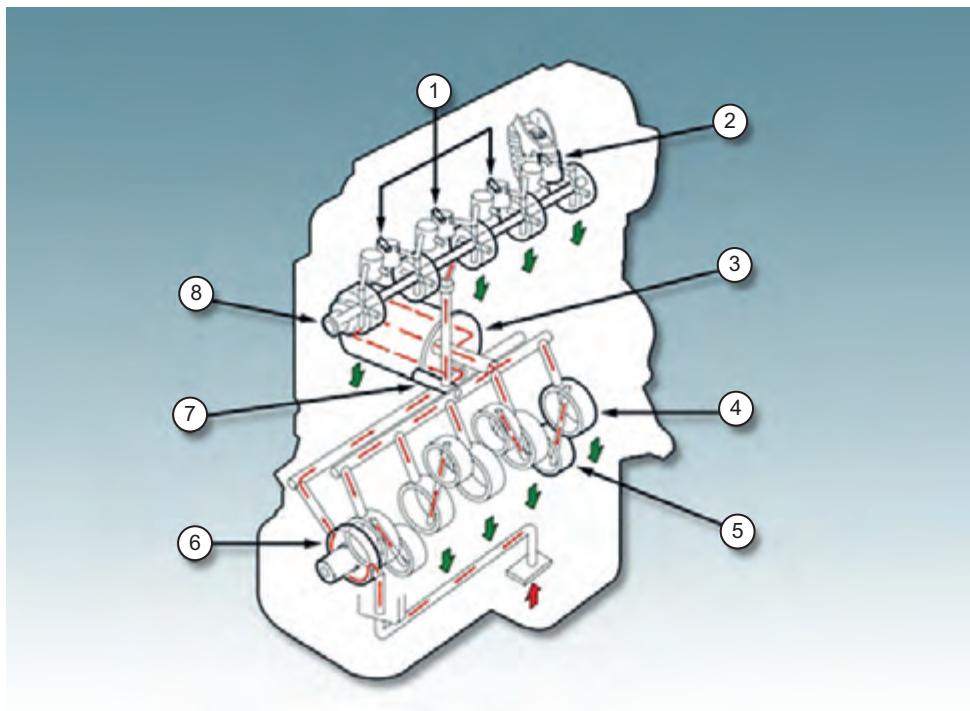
Oil flow: 1 – oil to rocker arms; 2 – hydraulic tappets; 3 – oil under pressure; 4f – crank main bearings; 5 – big-end bearings; 6 – crank driven oil pump; 7 – oil under pressure; 8 – camshaft
